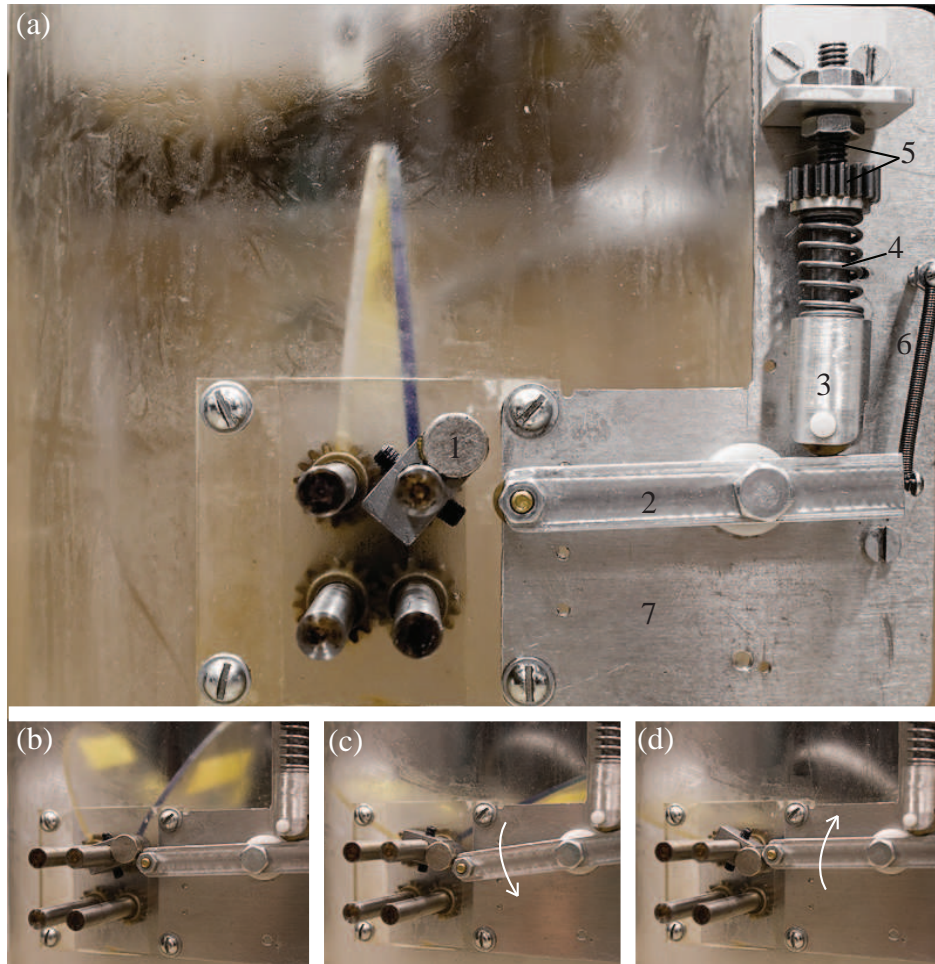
Photos of the latch mechanism. (a) The mechanism consists of (1) steel cam, attached to one of the upper flaps' gear shafts, (2) aluminum horizontal beam with a brass roller on one end, pivoted on a delrin bearing, (3) aluminum sliding follower with a brass roller on the bottom, (4) compression spring, (5) steel threaded shaft with spring preload adjuster, (6) extension spring and (7) mounting plate. (b) The spring resists the flaps closing. (c) The spring resistance is overcome, pushing the beam down. (d) The flaps move into the closed position
